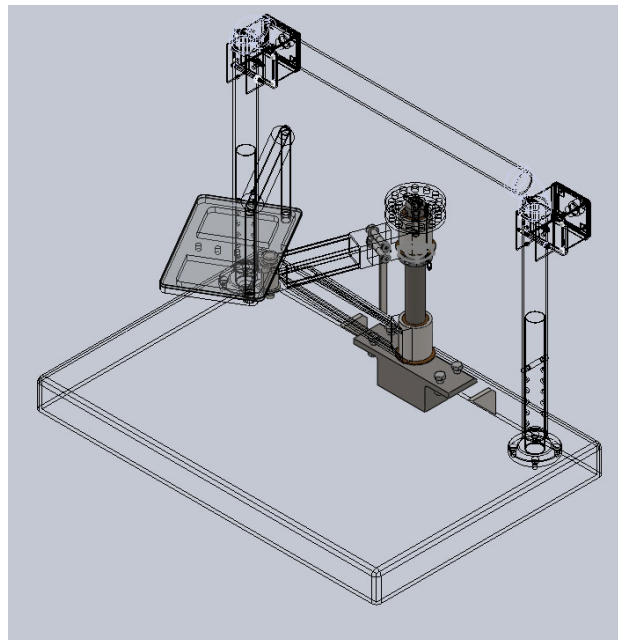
Showing the Hubs which can rotate about the Main Shaft
